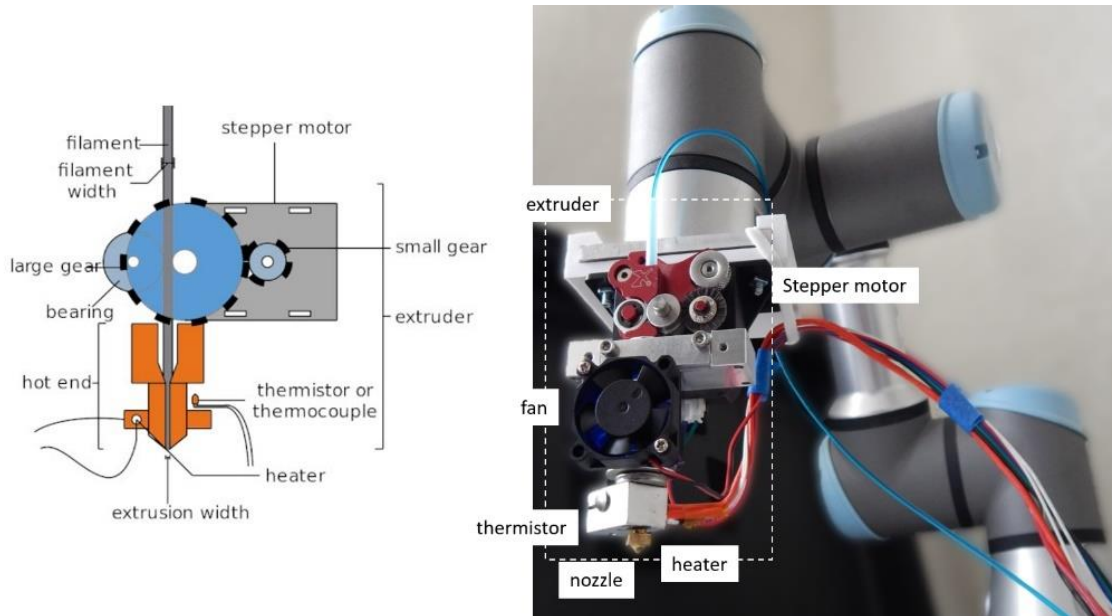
Extruder attached as a tool to the manipulator's arm
